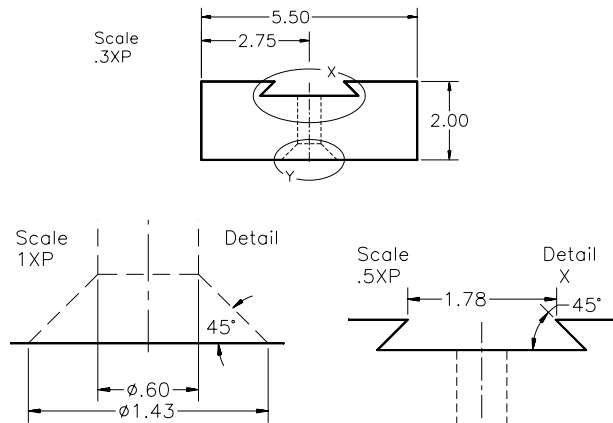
Dimensioning in paper model space viewports using paper space scaling or setting DIMSCALE to 0
